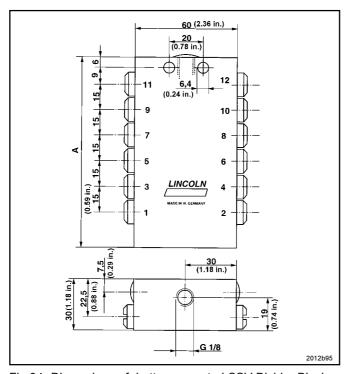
Dimensions of bottom mounted SSV Divider Blocks
